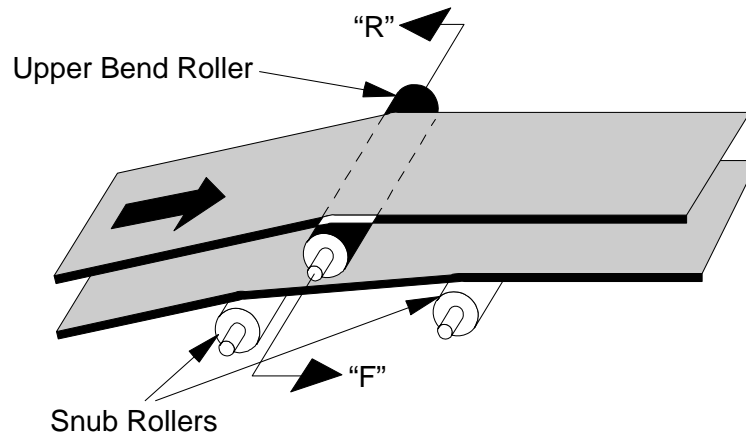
Adjusting Upper Bend Snub Rollers for Tracking the Return Run of Belting
